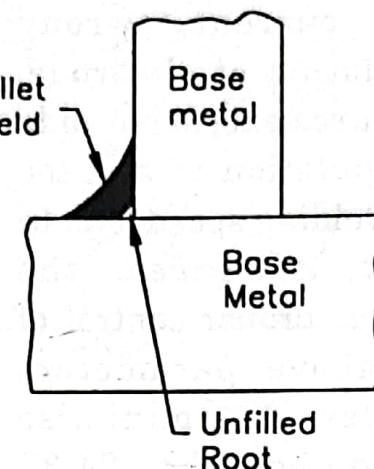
Incomplete penetration at the root of a Fillet weld.
